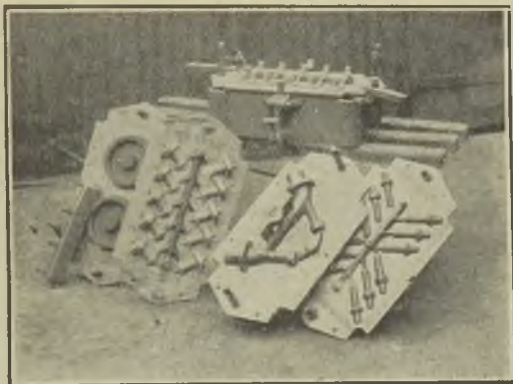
PATTERN-PLATE CARRIER FOR JAR RAM MACHINE AND 5 PATTERN PLATES OF ENGINE DETAILS, SUCH AS GEAR BLANKS, OIL-PUMP DETAILS, WATER PUMPS, VALVE GUIDES AND CAMSHAFT BEARINGS.
